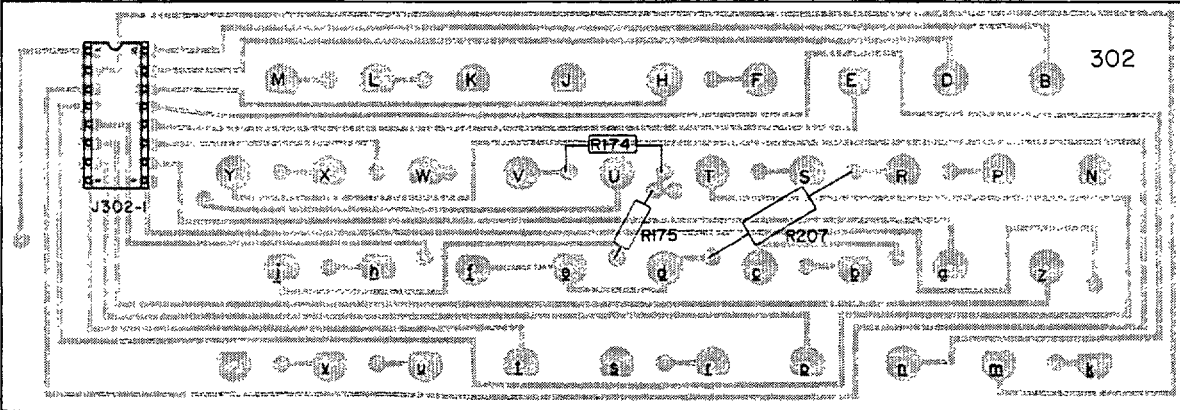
P.C. BOARD ASSEMBLY, BOARD 302, DRAWING
